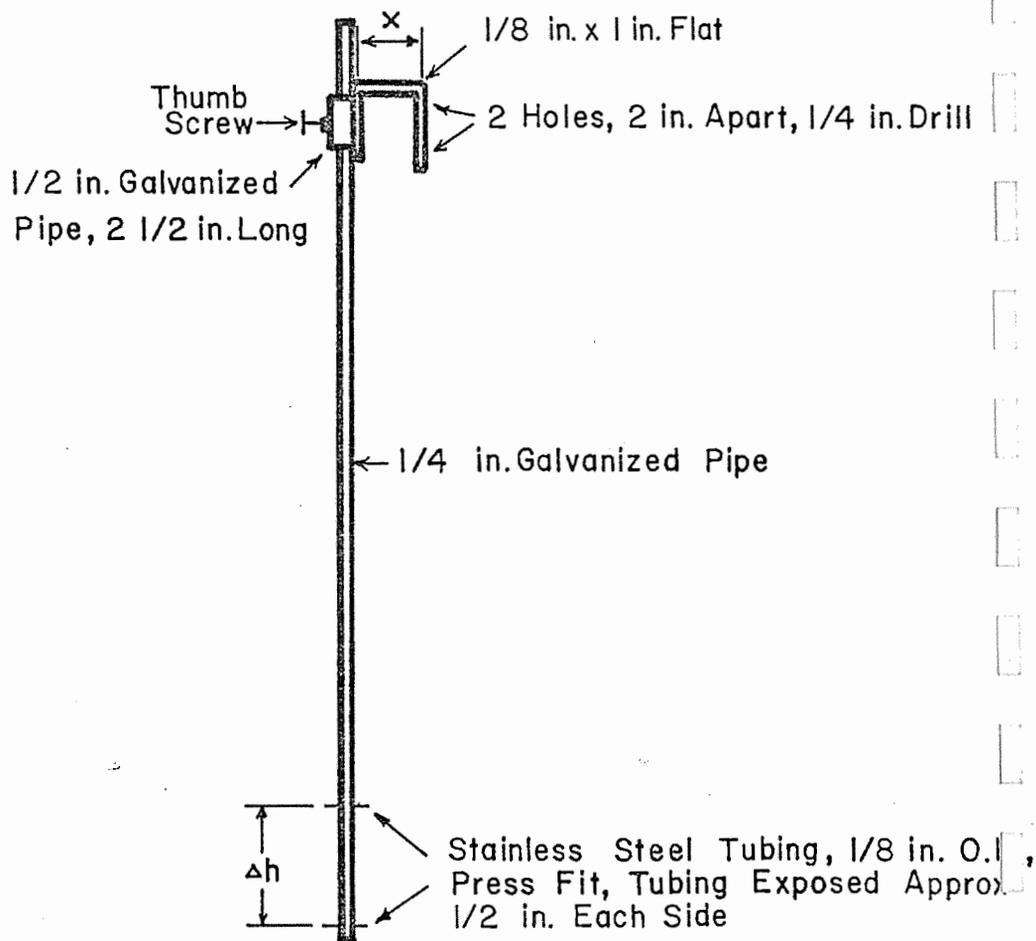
Schematic of double bubbler and bracket used to attach in stilling well.
